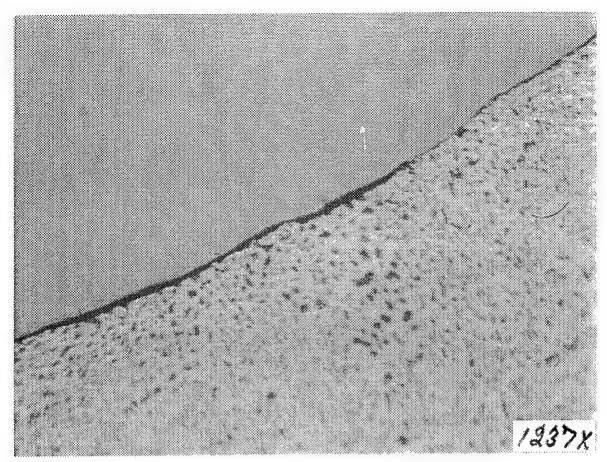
Microsection of Alloy 42 Gullwing Lead from Vendor A Showing Large Sections of the Lead/Solder Interface with Gaps Between the Lead Surface and the Solder Showing an Almost Total Lack of Wetting.
